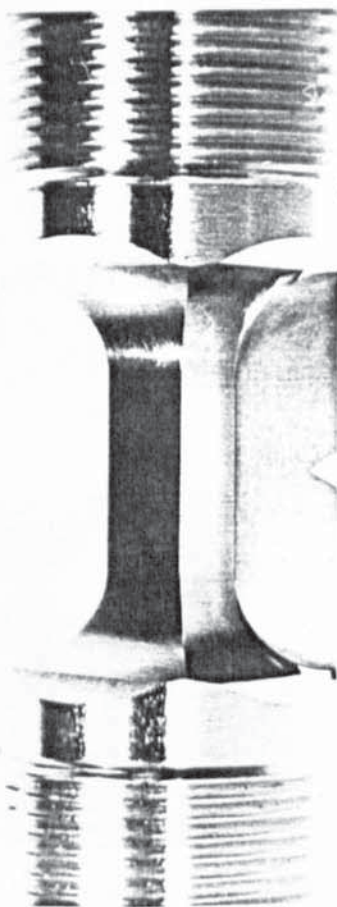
Corner-Crack Specimen Design for Short Cracks.
